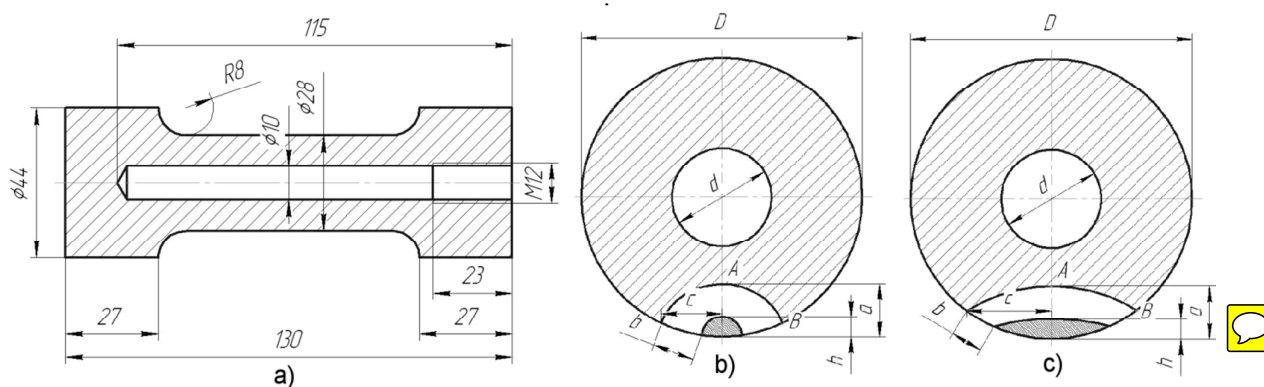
Details of the hollow specimen: dimension and geometry a); initial circular notch b); initial elliptical notch c).
